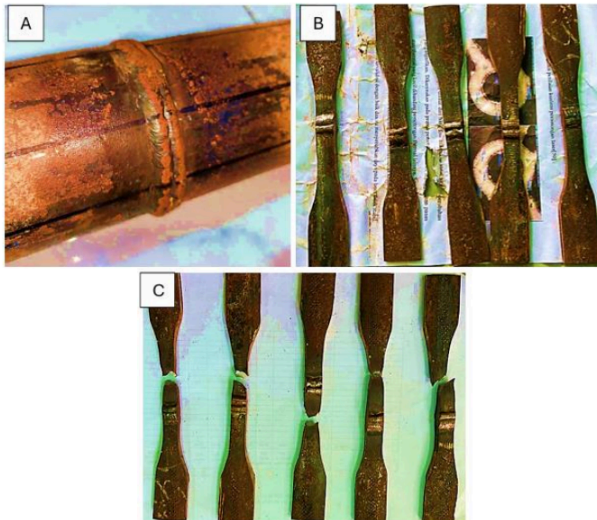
a) welding specimen, b) specimen forming, c) Tensile testing results
